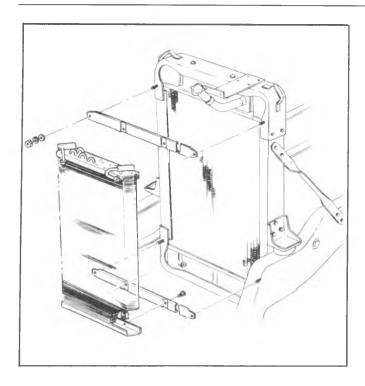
B-69--Condenser (Motor Home Chasis Unit)
